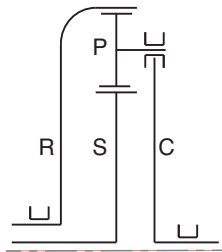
Scheme of a planetary gearbox: S sun gear, R ring gear, P Planet, C planet carrier
